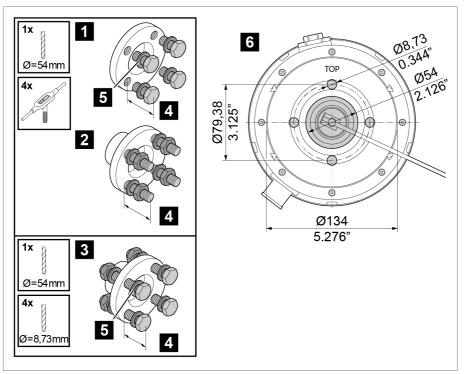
Connecting flange with holes for accommodating the NAT/DS flange
